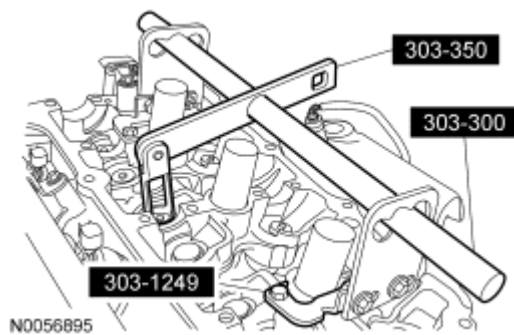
Removing Keys, Retainer & Spring Using Special Tools (303-1249, 303-350, 303-300)
